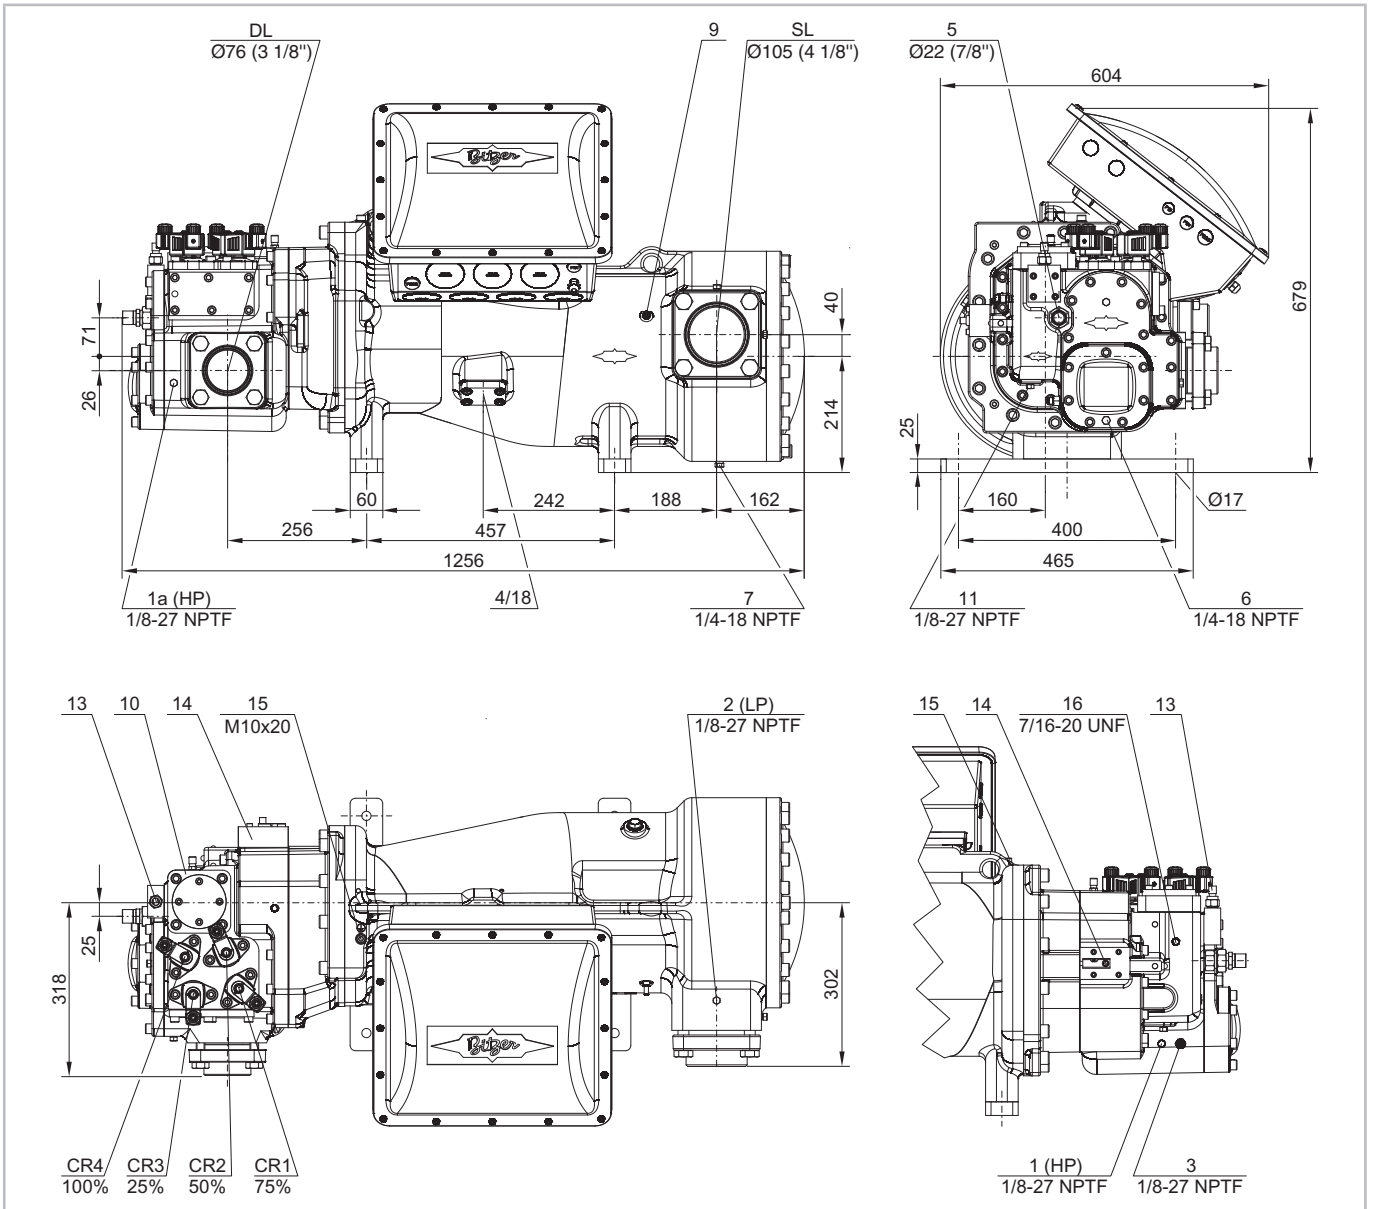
Dimensional drawing HS.8551 .. HS.8571
